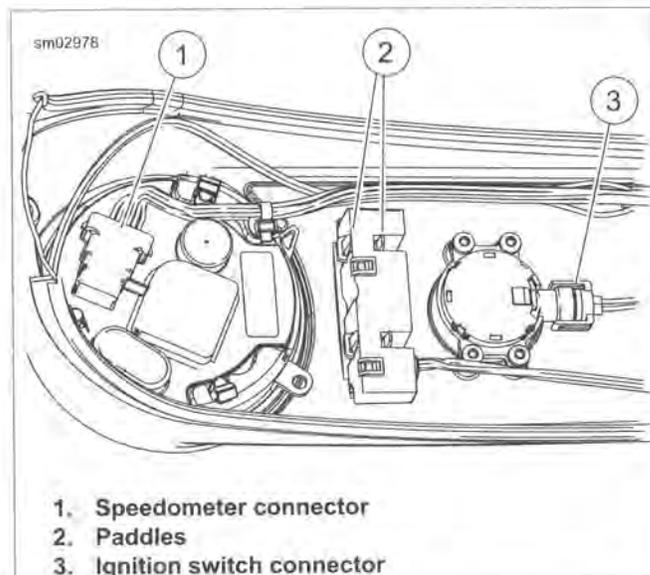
Release Paddles to Free Indicator Lamp Assembly (FLHR/C)
